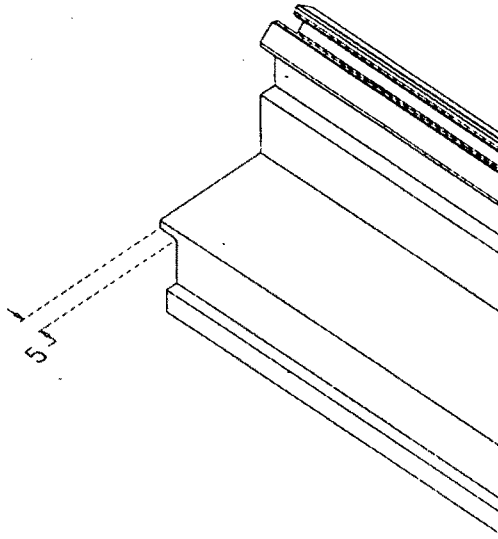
Processing drawing of side finishing bar of top light(A details)
